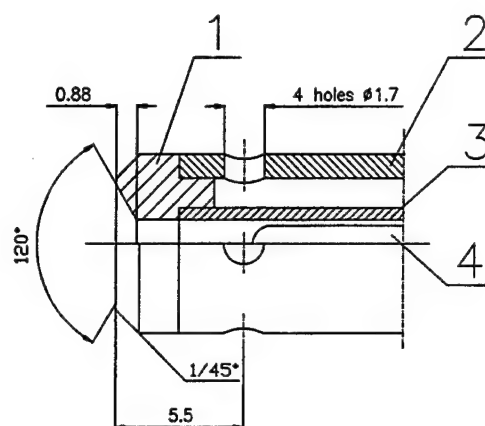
Compound probe. 1 - Inlet tip; 2 - Body; 3 - Total pressure pipe; 4 - Sheathed thermocouple.
